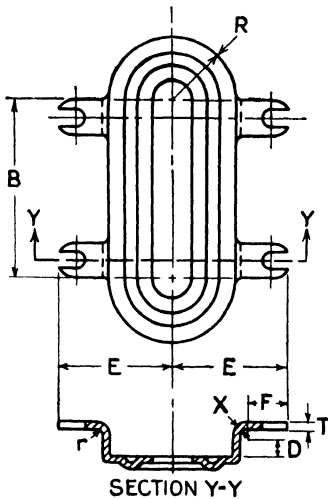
Mild-steel bracket for which a stamping and blanking die is required.
